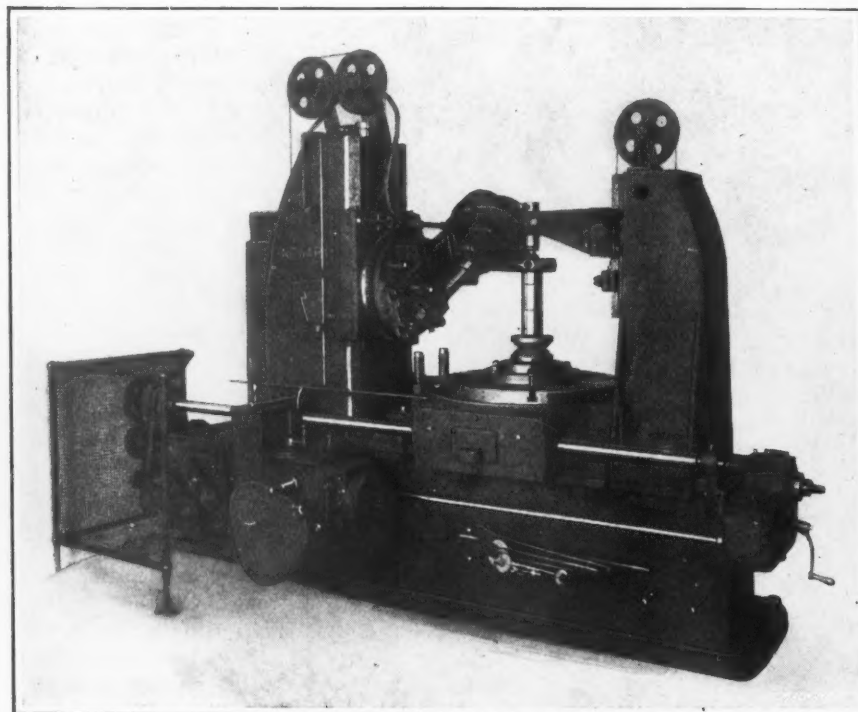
No. 5 Gear-hobbing Machine equipped with Rigid Support for Work-arbor
